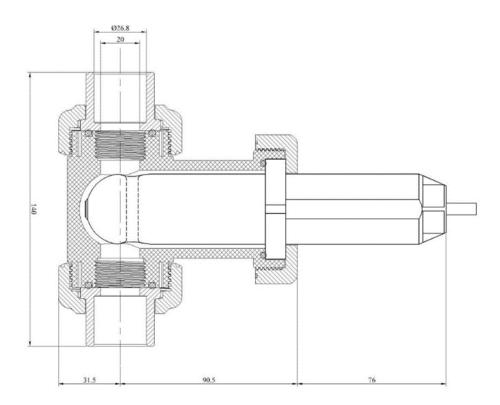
ST-750 Probe / ST-001 Inline Tee Assembly Diagram
